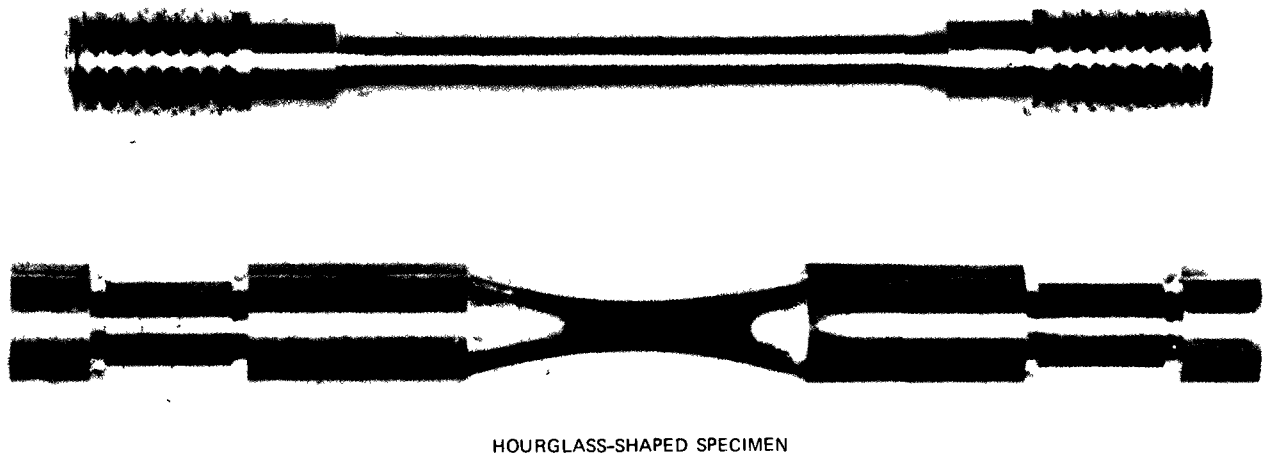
Cylindrical and hourglass-shaped specimens used in tensile tests. (Scale: approximately 1.7.)
